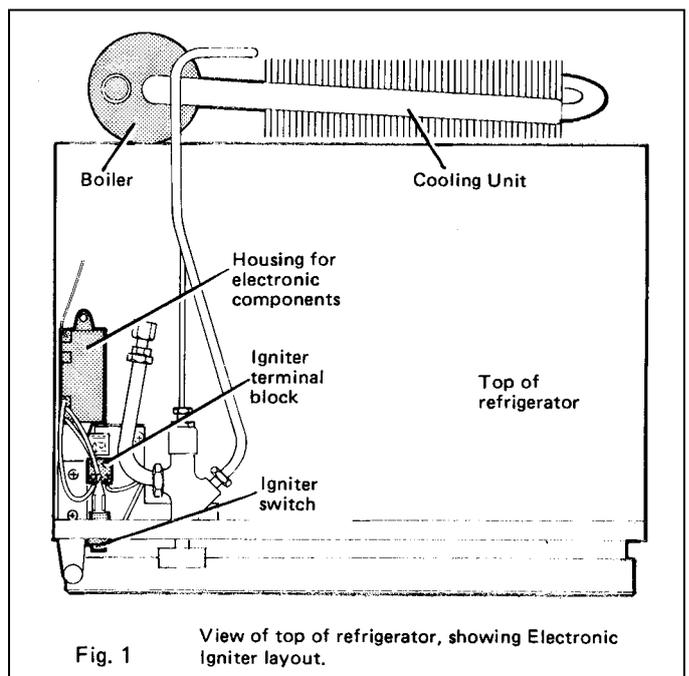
View of top of refrigerator, showing Electronic Igniter layout.
